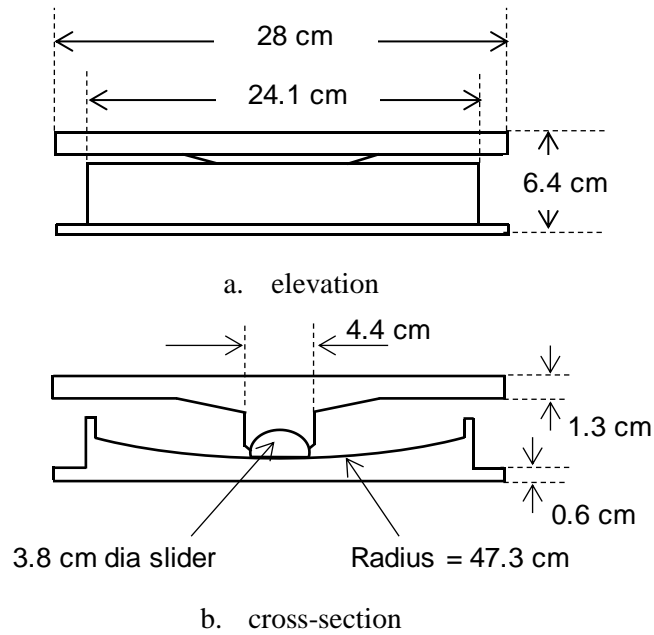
Fabrication drawings of SFP bearings, provided by Earthquake Protection Systems
